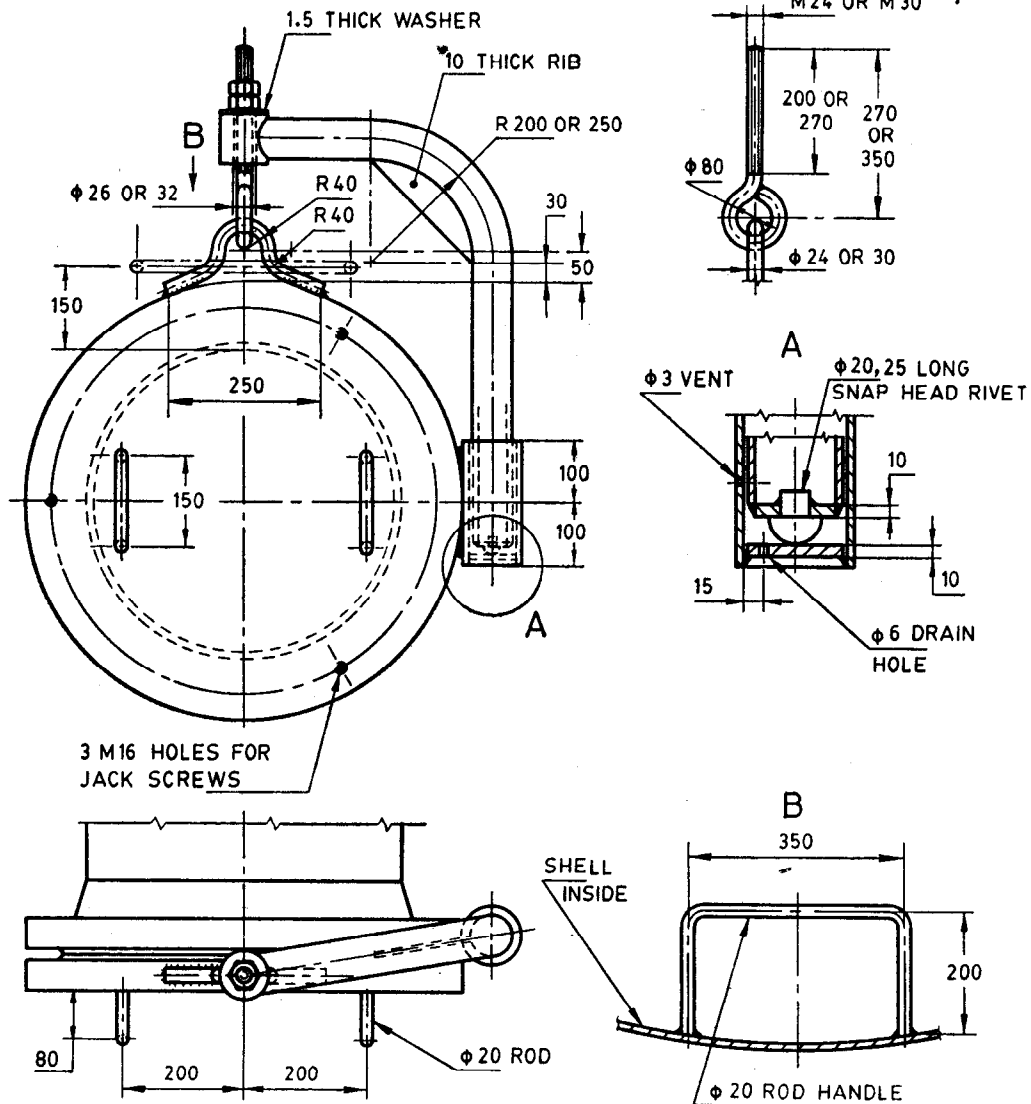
MANHOLE WITH DAVIT (TOP OPENING)
